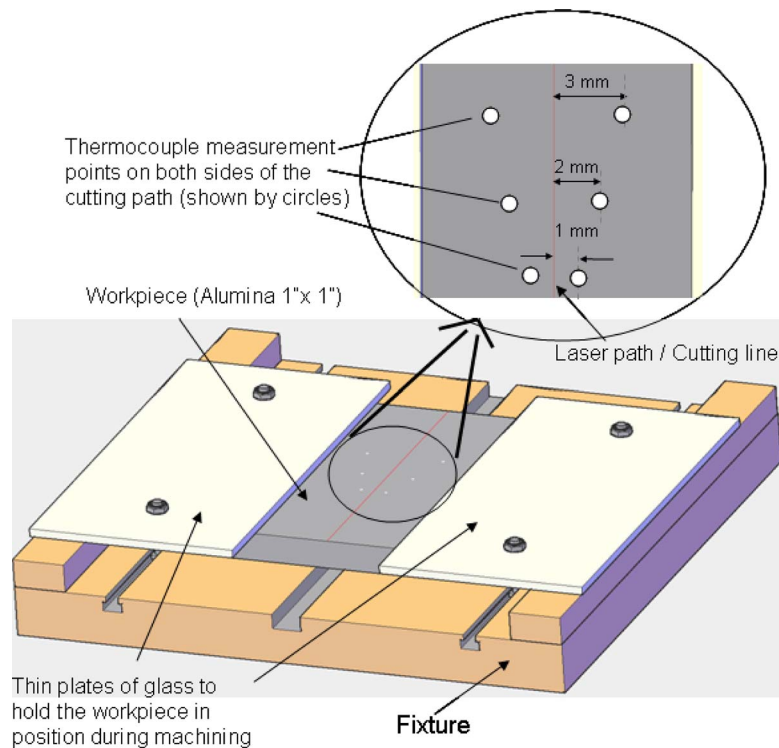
Schematic representation of the fixture with the workpiece in position during machining. Inset shows the thermocouple measurement points for recording the temperature history.
